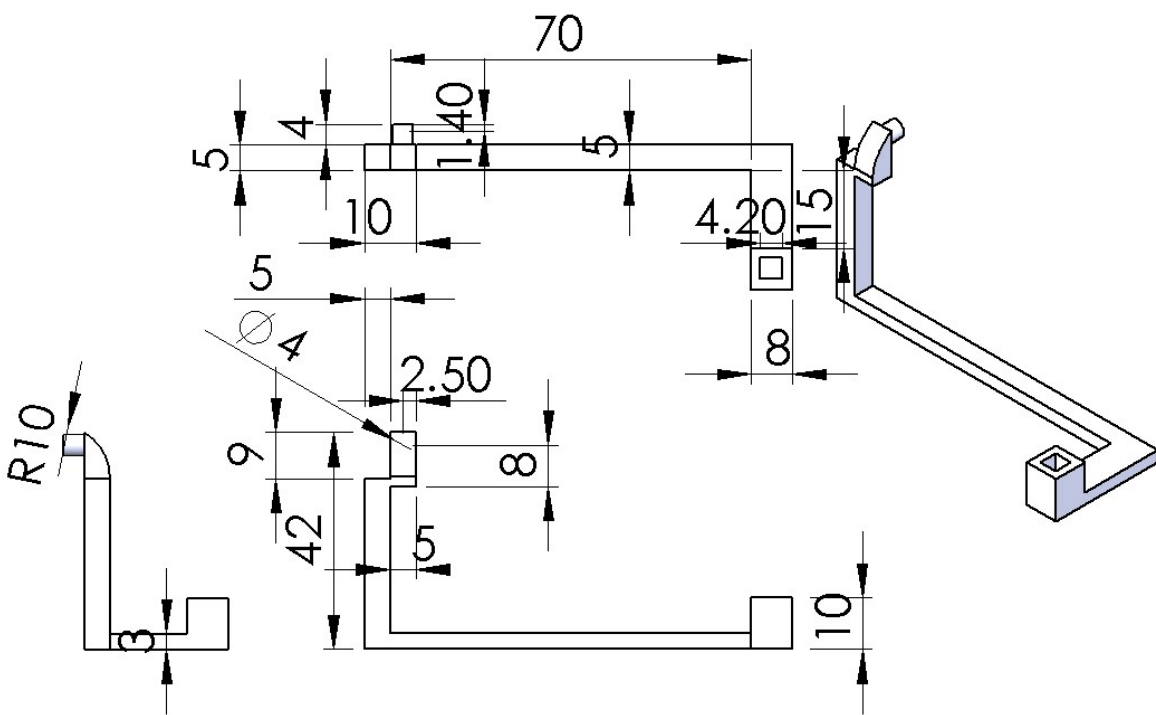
3 view drawing of the arm used in the propeller setup
